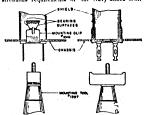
K-TRAN mounting clip and mounting tool.
